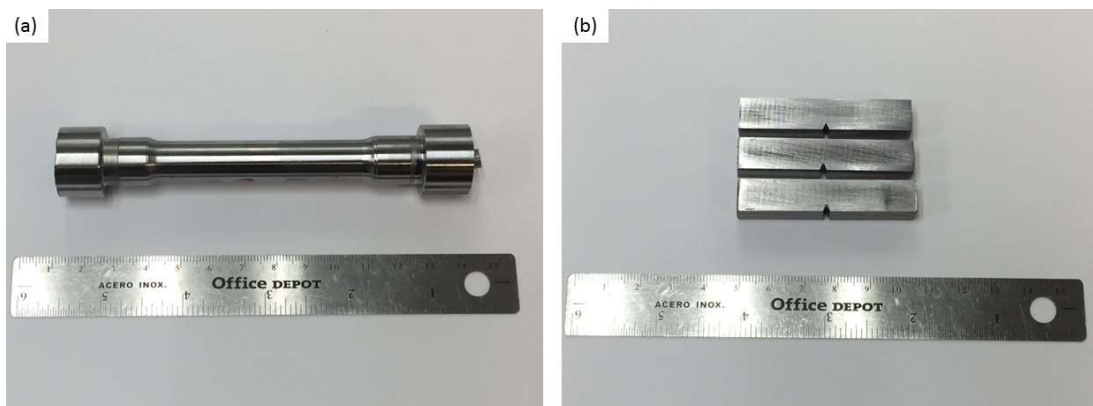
Illustration of (a) tensile and (b) impact specimens after machining process.
